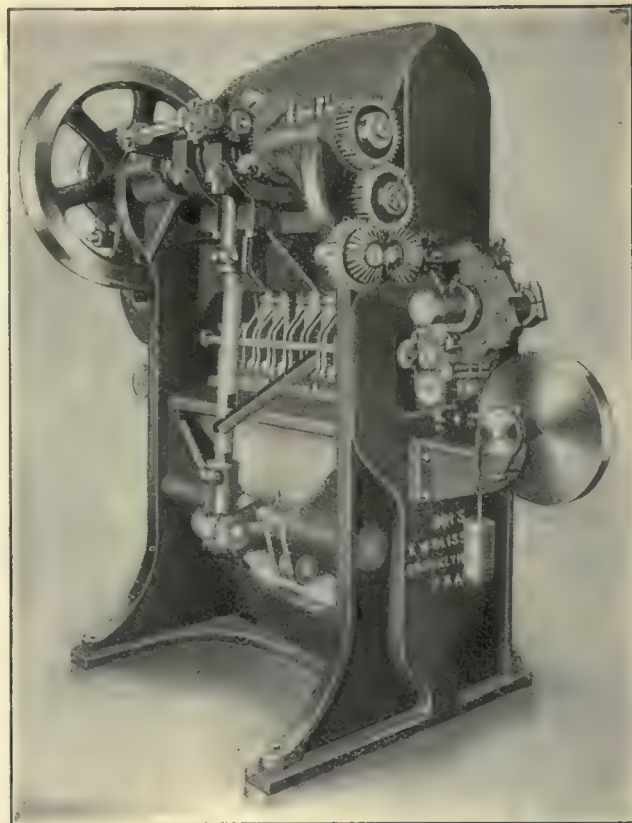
Rear View, Showing Feed and Stock Reel.
